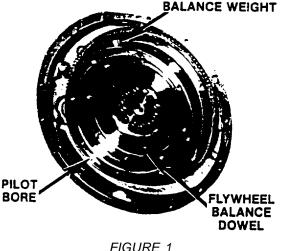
7N6395 FLYWHEEL ASSEMBLY
